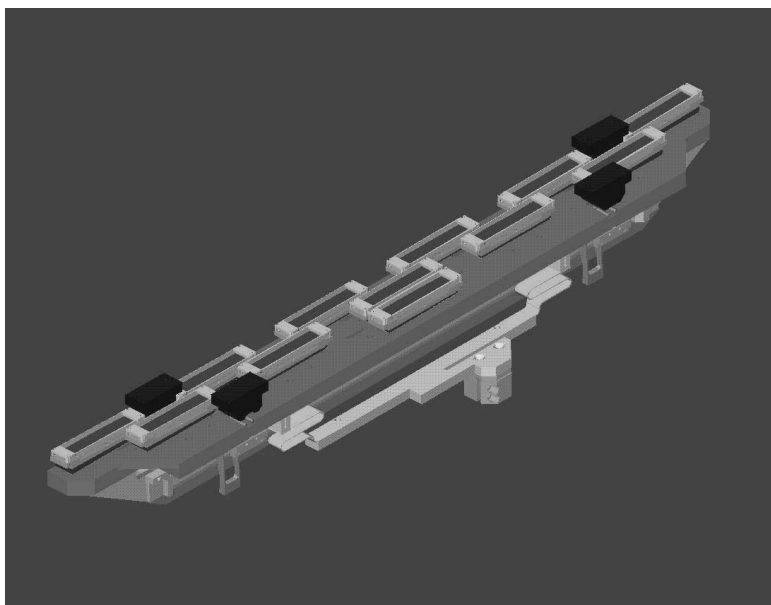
Pro/Engineer drawing of an astrometric Tbar, showing all CCDs, the astrometric kinematic mounts, and the cooling assembly
